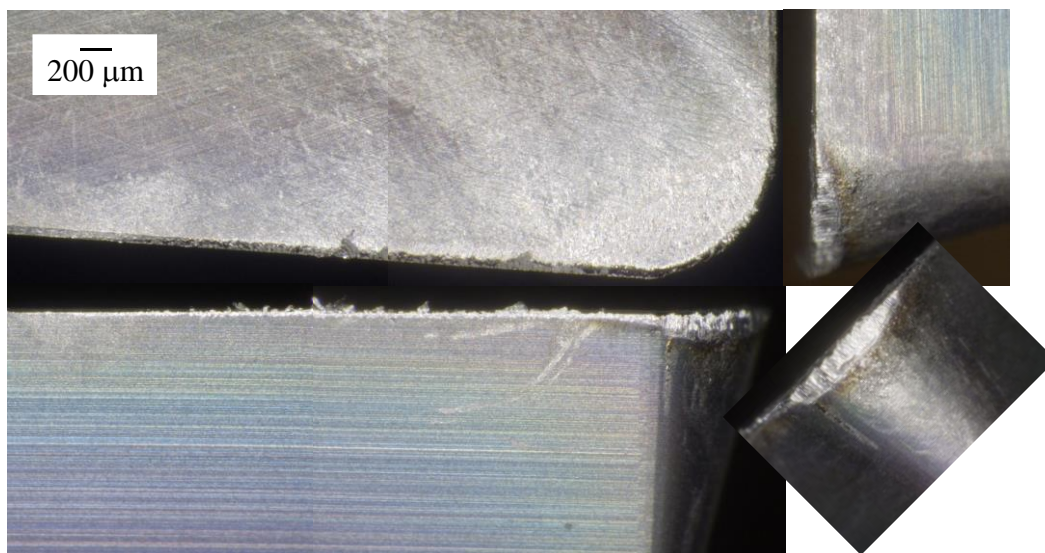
Each face of the insert in tool axis offset 3 mm after tool life experiment.
